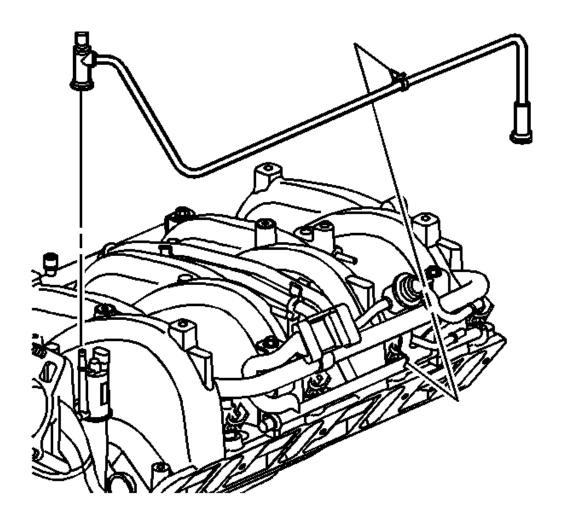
View Of EVAP Tube Courtesy of GENERAL MOTORS CORP.
